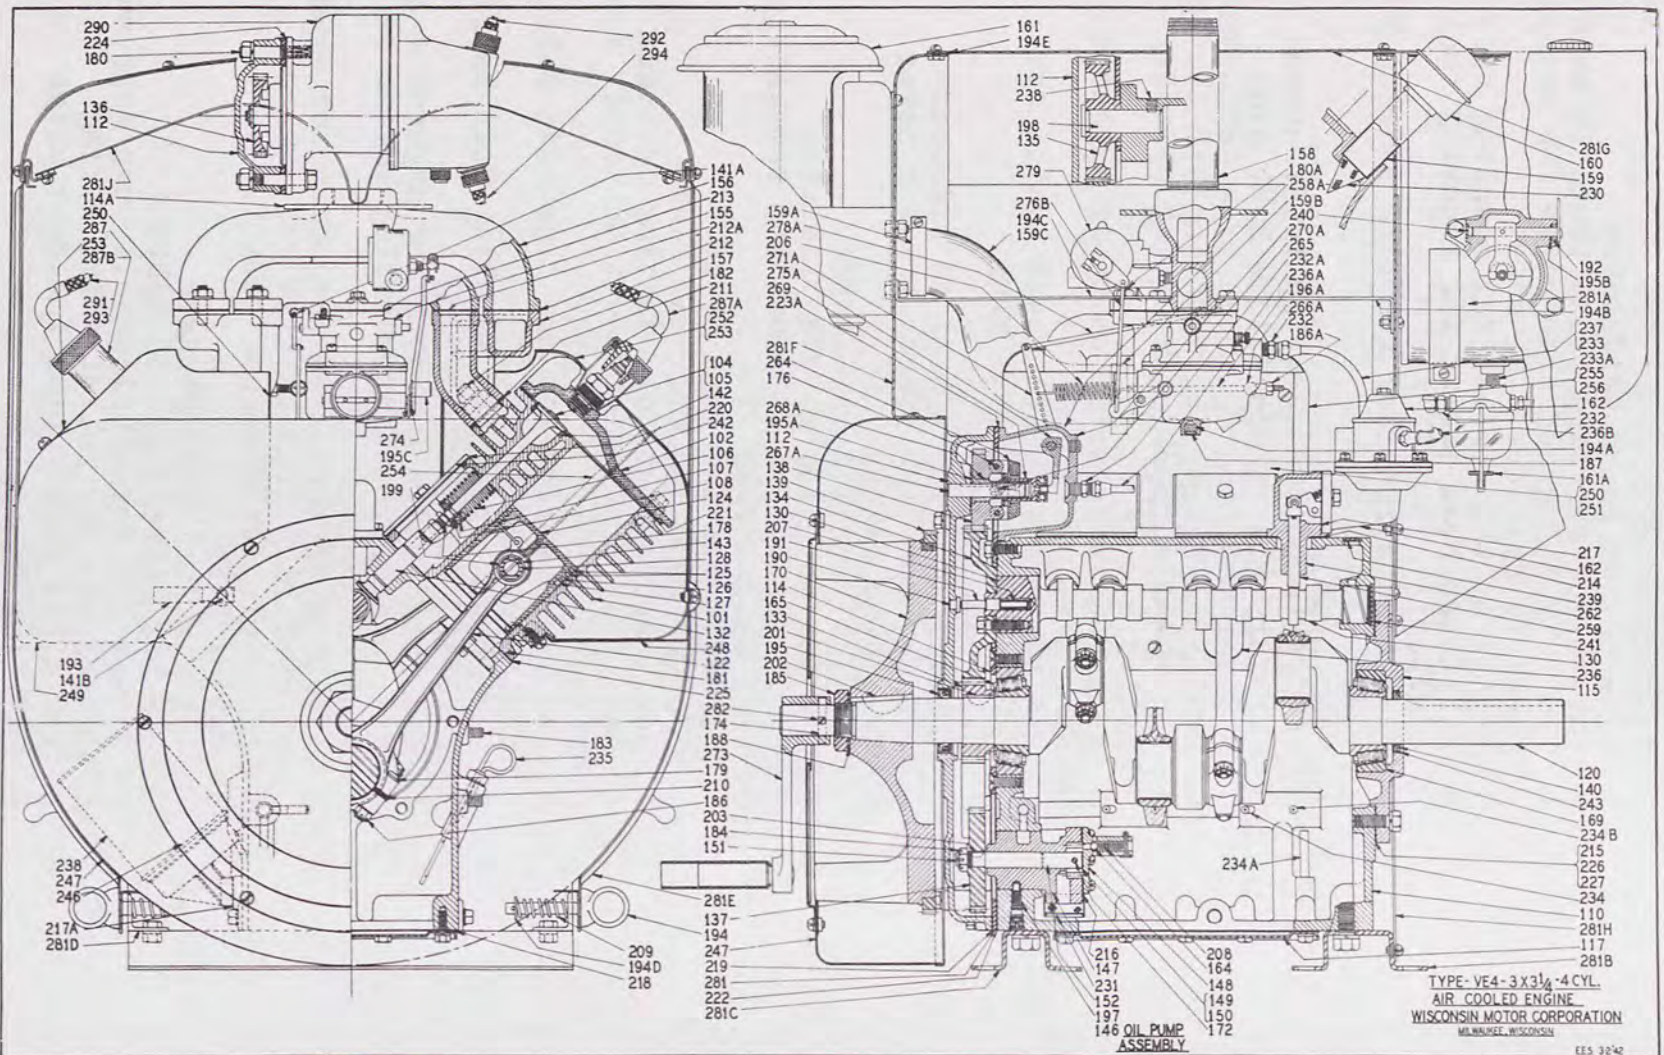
POWER UNIT PE-99-A ENGINE CROSS SECTION
